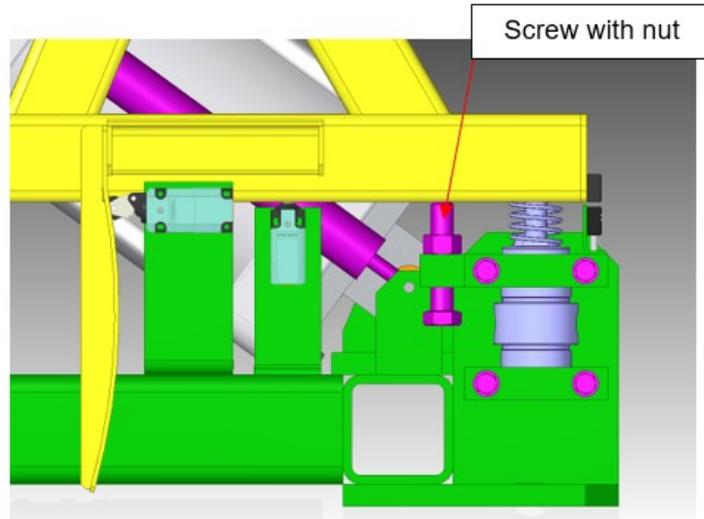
Side view of the adjustable mechanical stop for the shutter closed position
